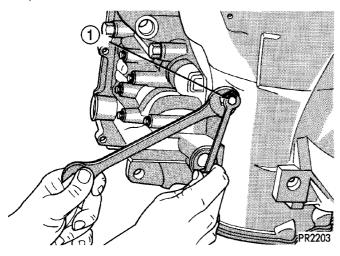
Adjust Kickdown Band 1 - KICKDOWN BAND ADJUSTING SCREW
